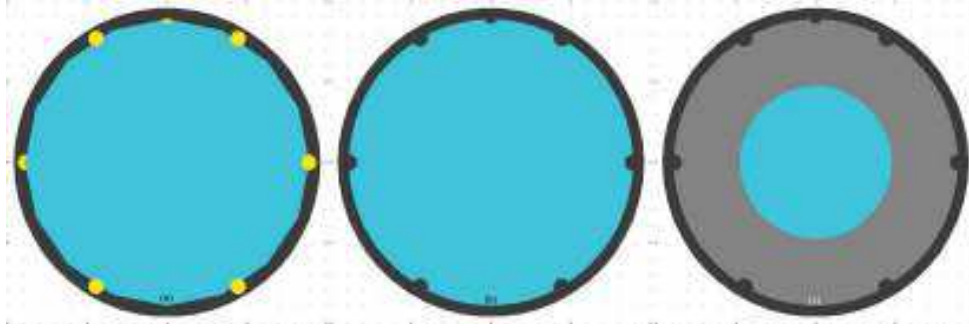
(a) Casing and outer part of stator with shapes for weld recesses and keyway, (b) subtraction of shapes in (a), (c) first shape for inner part of stator
